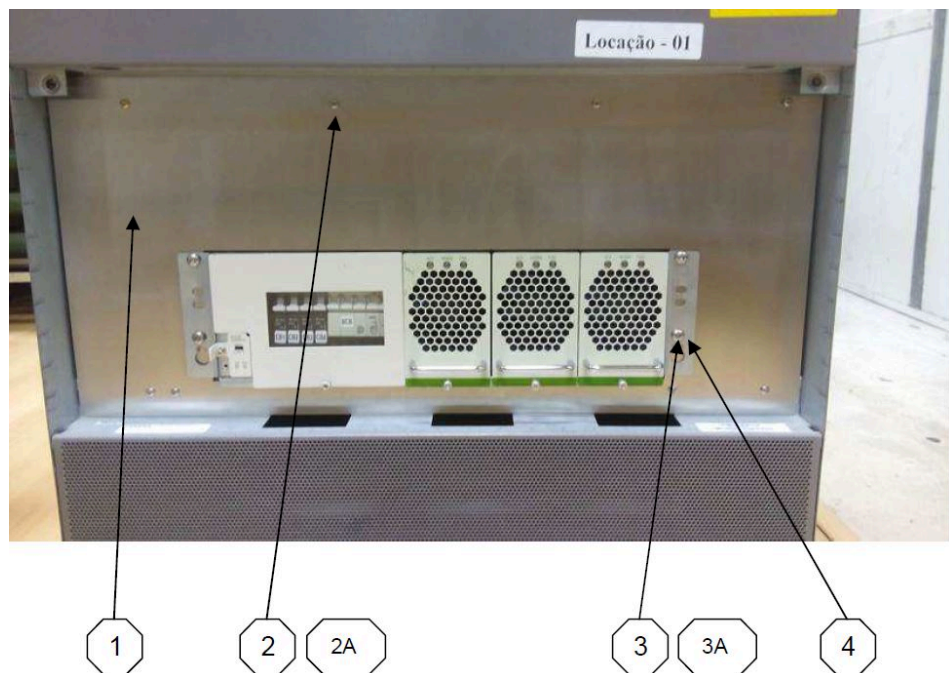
Kit C39165-A7080-B177-1 Components to be used on the Front side
